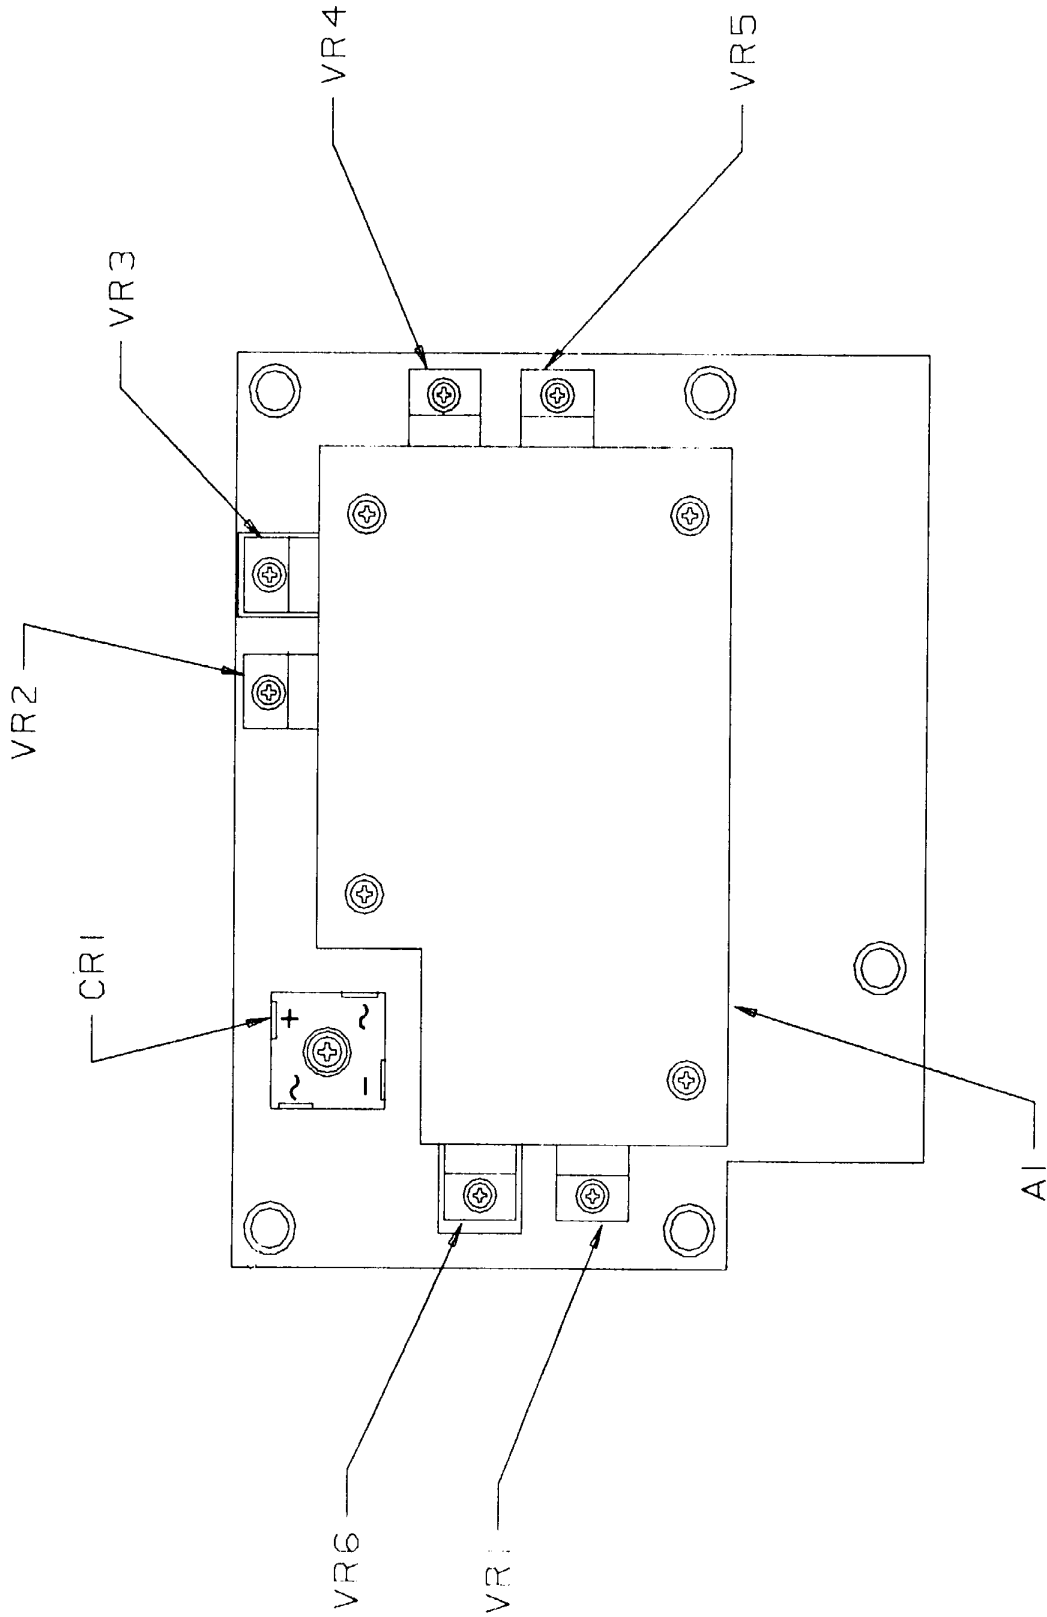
Power Supply Heatsink Assembly A15A2 Component Location Diagram (10073-3250)
